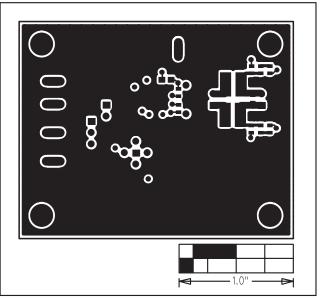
MAX9700B EV Kit PC Board Layout—Solder Side
